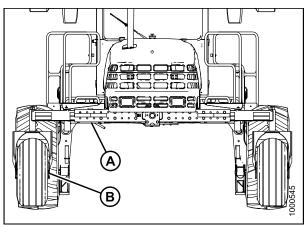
Caster Wheel Assembly and Walking Beam (Engine-Forward View)
